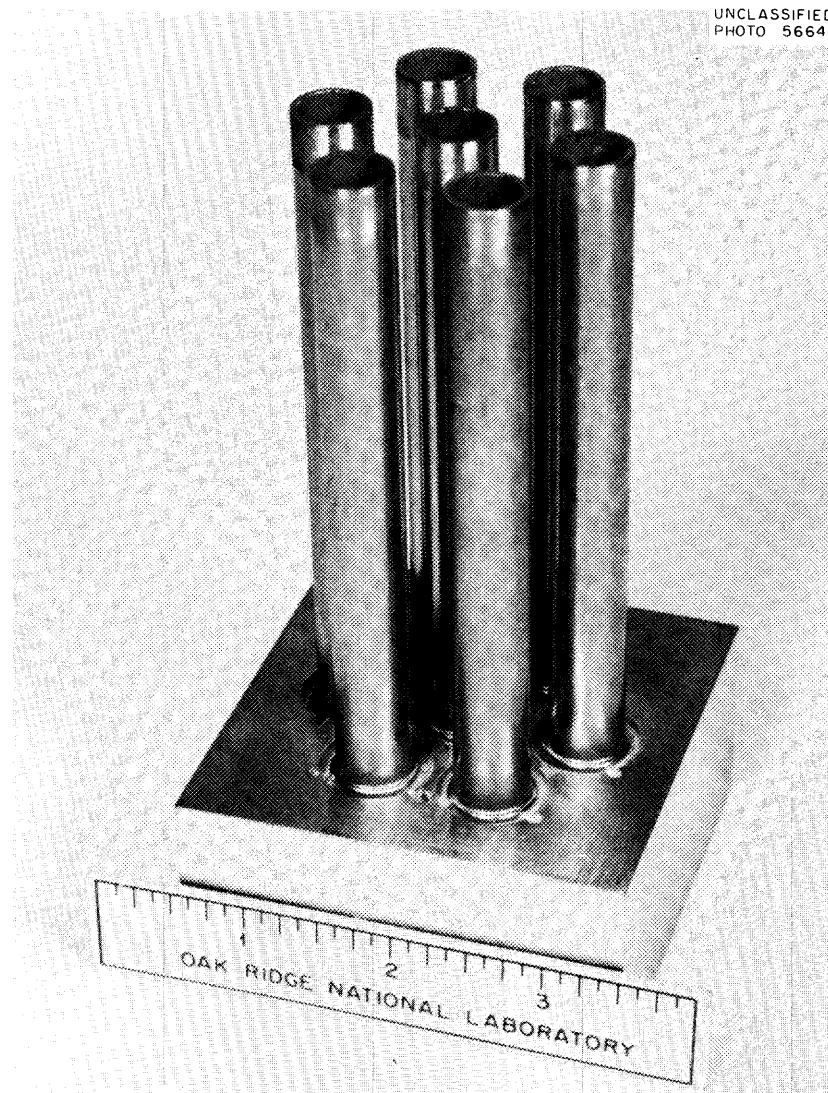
Typical Heat-Exchanger Test Assembly.
